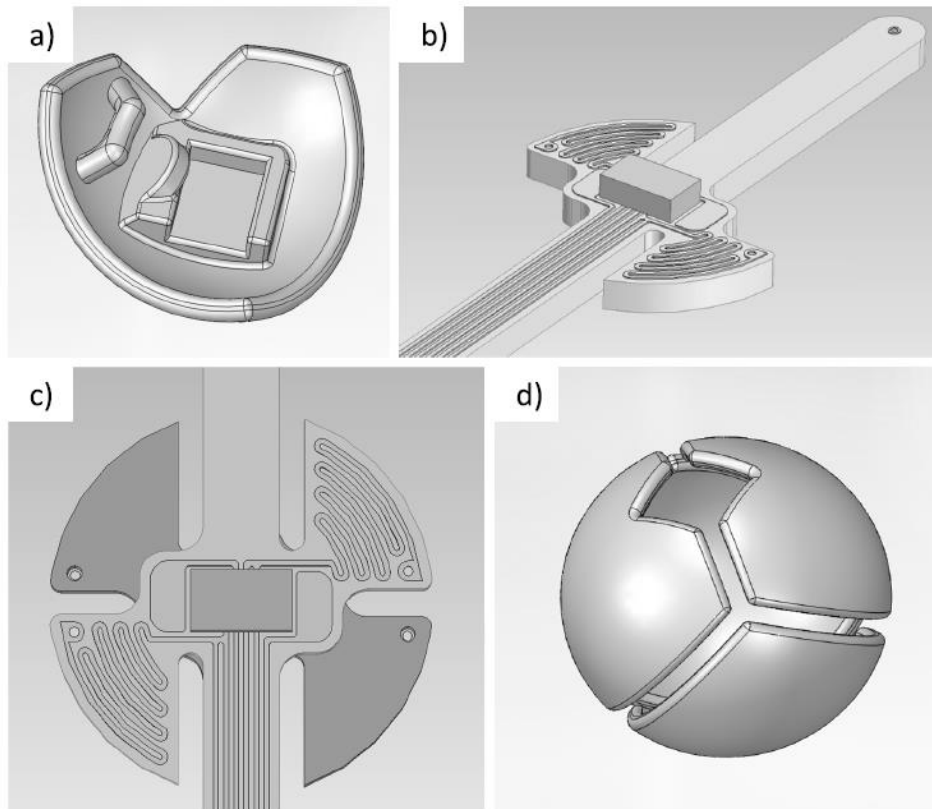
Models of the new wind sensor components: a) Triangular sector with its interior heat resistor mold. b) Printed circuit board with electrical instalment & core resistor. c) assembly of two printed circuit boards. d) Assembly of four sectors creating a spherical structure. [1]
